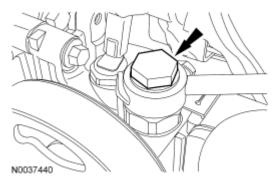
Locating Power Steering Pressure (PSP) Tube Bolt Courtesy of FORD MOTOR CO.
